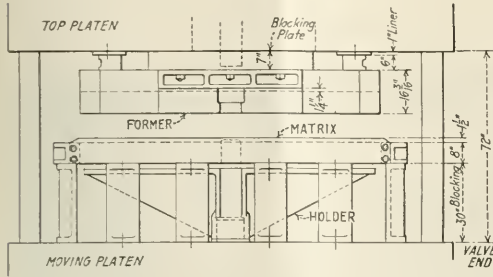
Arrangement of Forming Dies In 500-Ton Hydraulic Press
